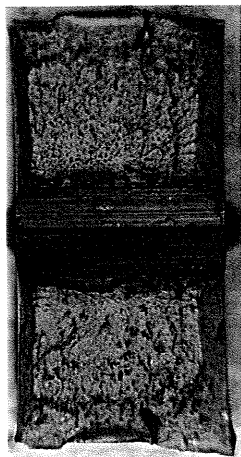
Charpy Impact Specimen Fracture Surfaces for Diablo Canyon Unit 1 Reactor Vessel Weld Metal
